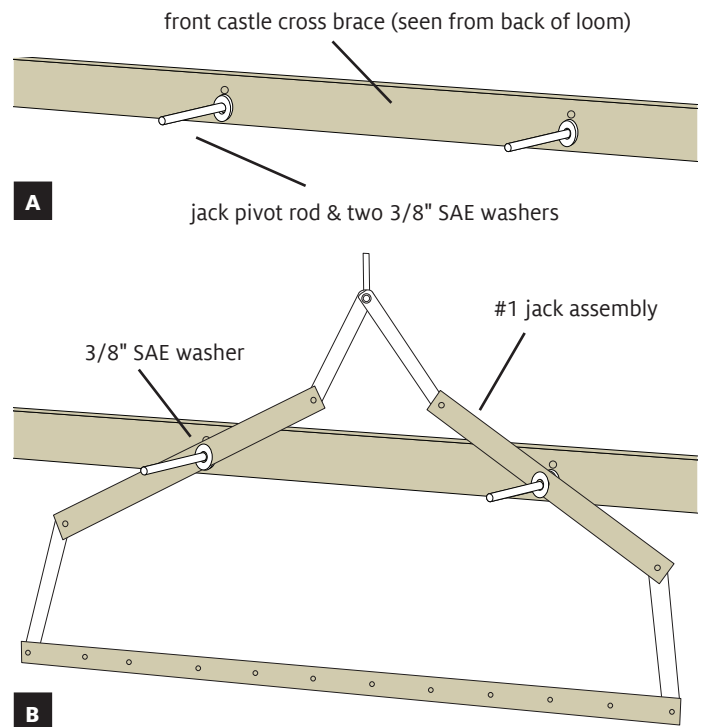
INSTALL THE JACK ASSEMBLIES
